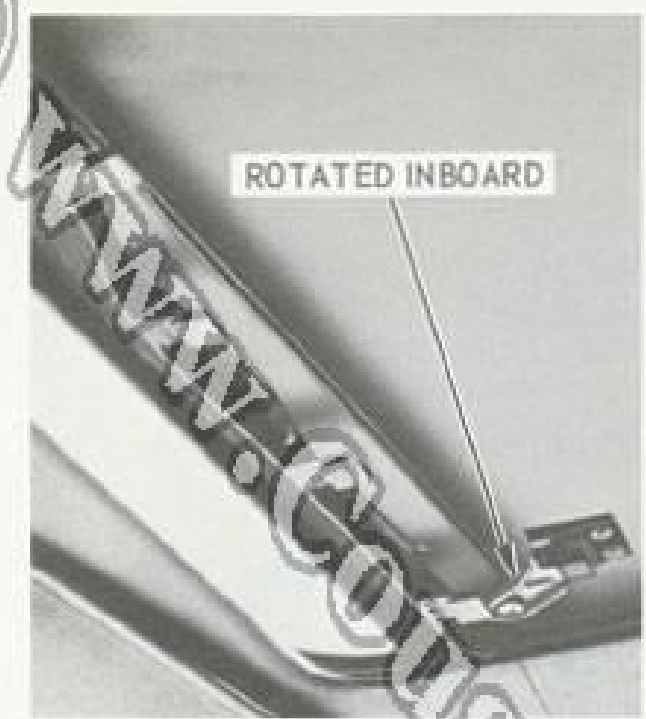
Front Slide Assembly, Pushed Off Guide Rail
